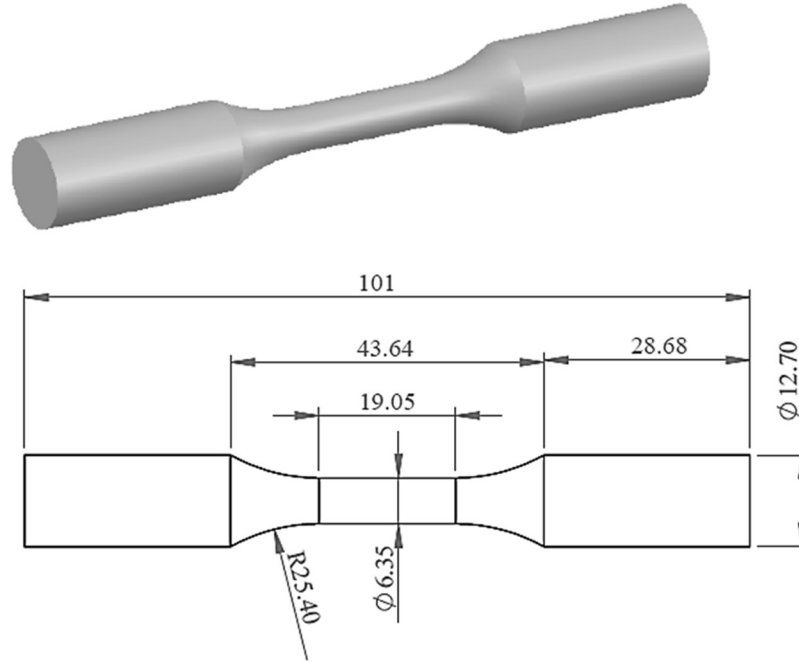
Cyclic axial test specimen (All dimensions in mm).
